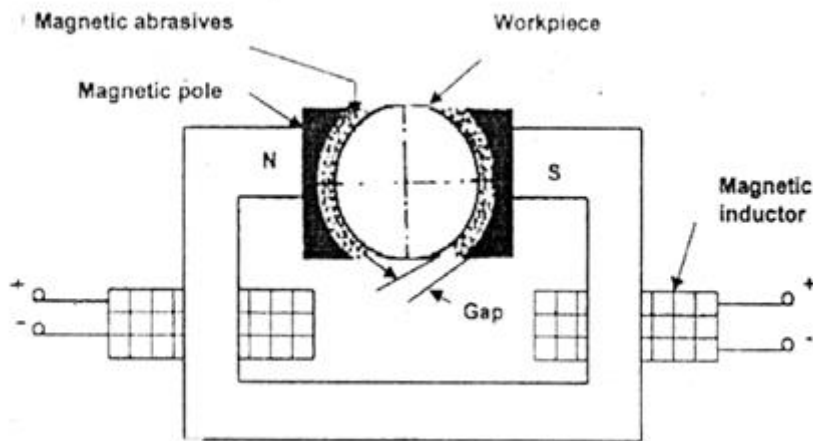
Schematic view of MFAM process for cylindrical (external) surface.
